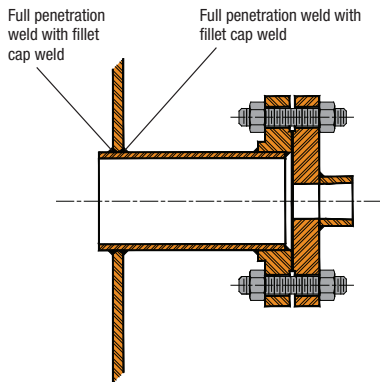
This figure shows details of a nozzle that is attached to a tank using full penetration welds and a capping fillet weld on the inside and outside of the nozzle
